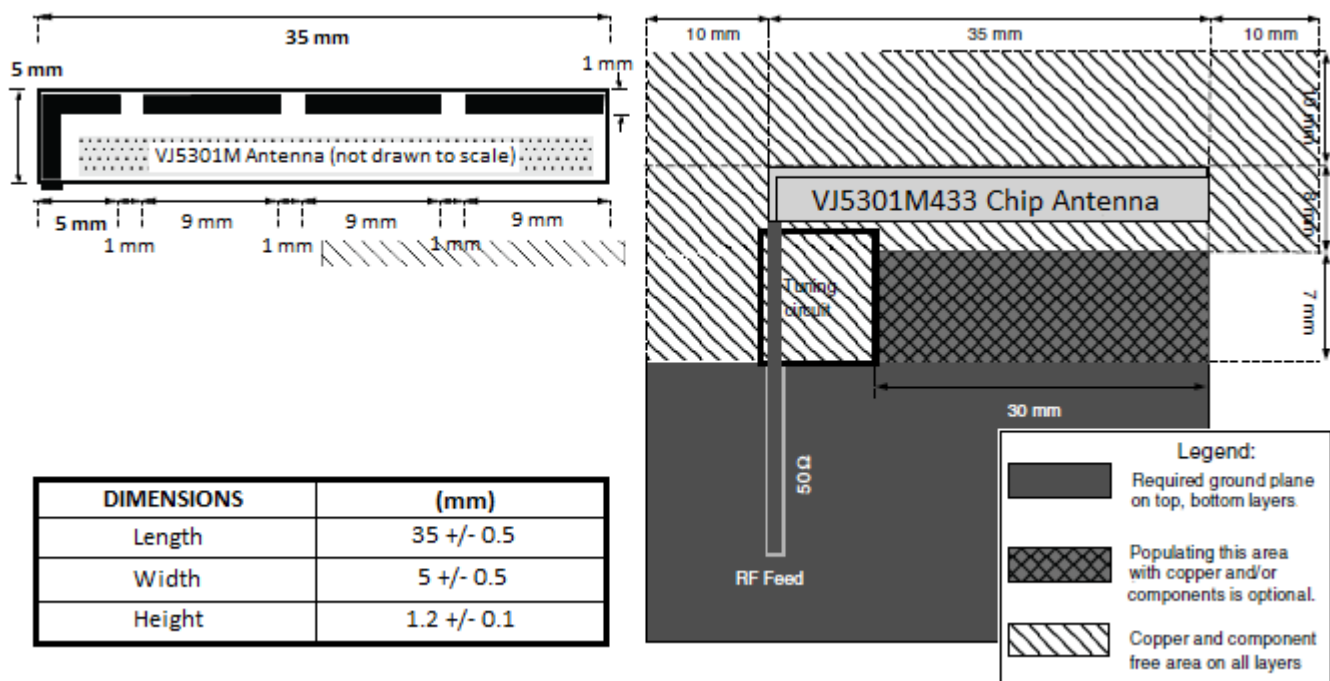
of VJ5301M433 footprint, chip antenna mechanical dimensions, and PCB layout dimensions
